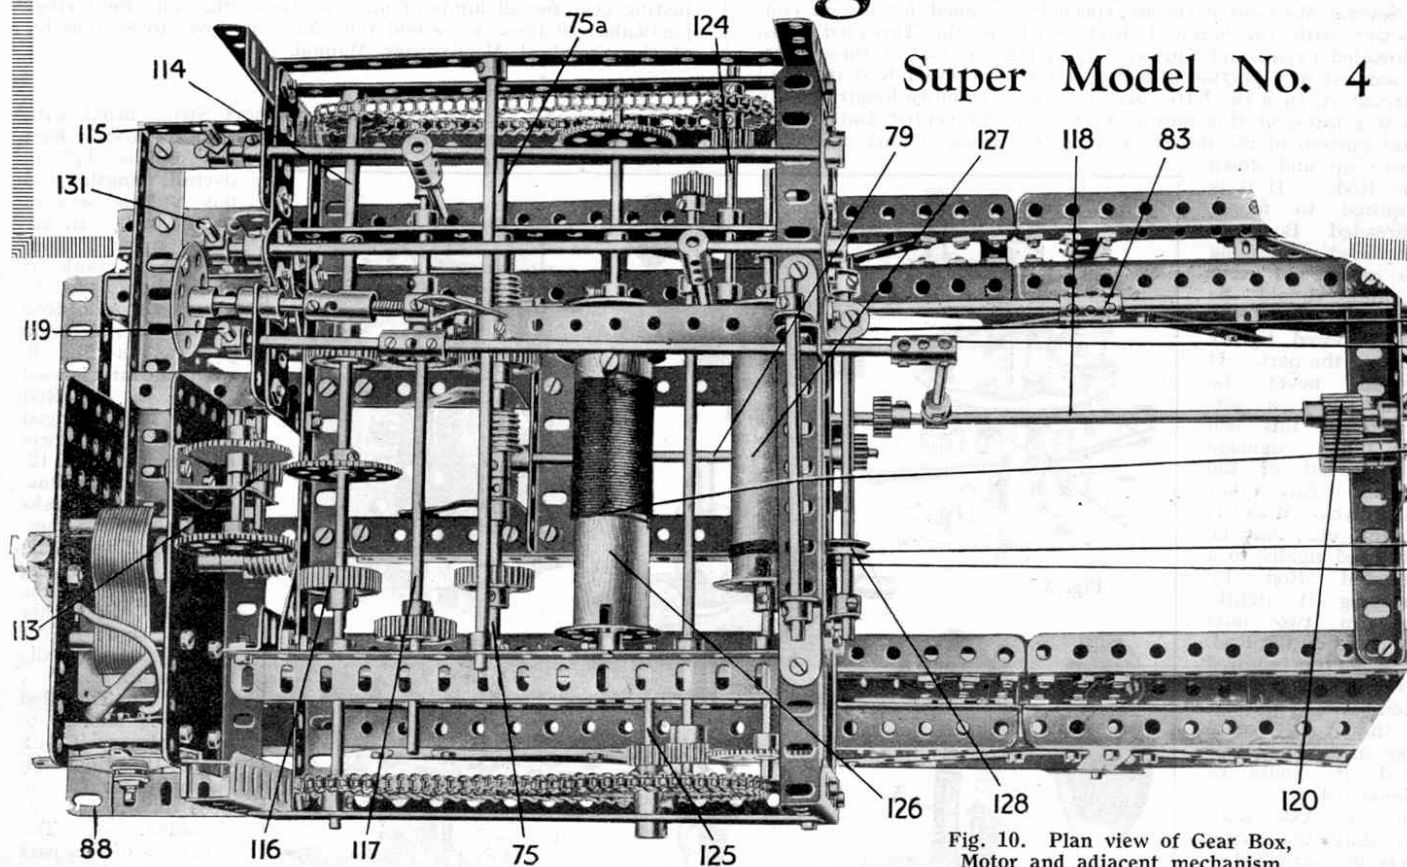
Plan view of Gear Box, Motor and adjacent mechanism
